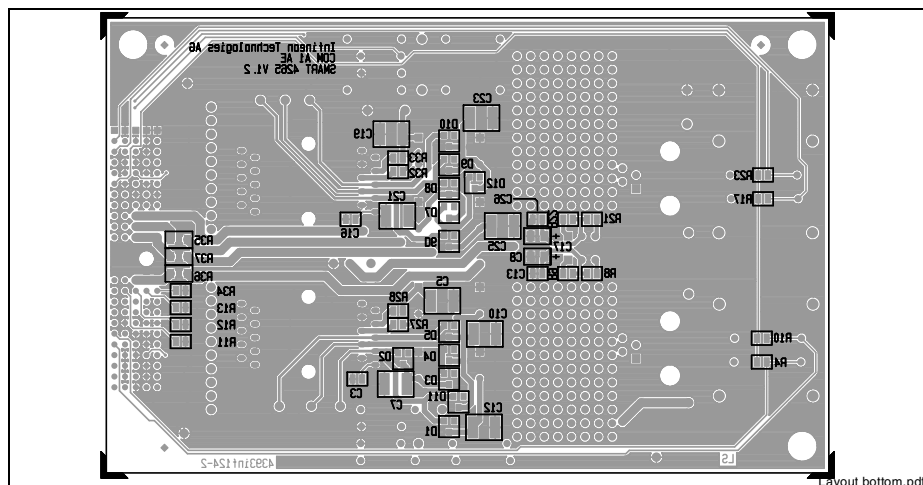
Floor Plan of the SLIC Evaluation Board V1.2 (Bottom View)
